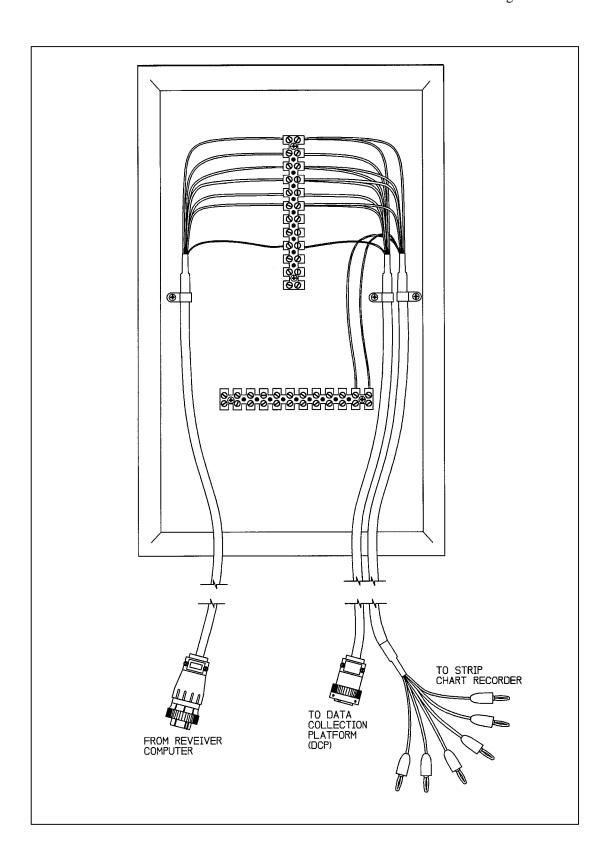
Terminal Strip Board With Cable Connectors Diagram.
